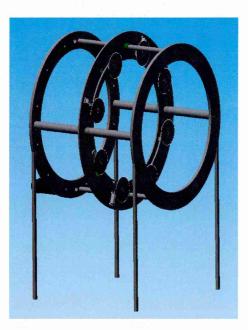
Cad Model Of Pfaff Single Hot Air Welding Machine.
